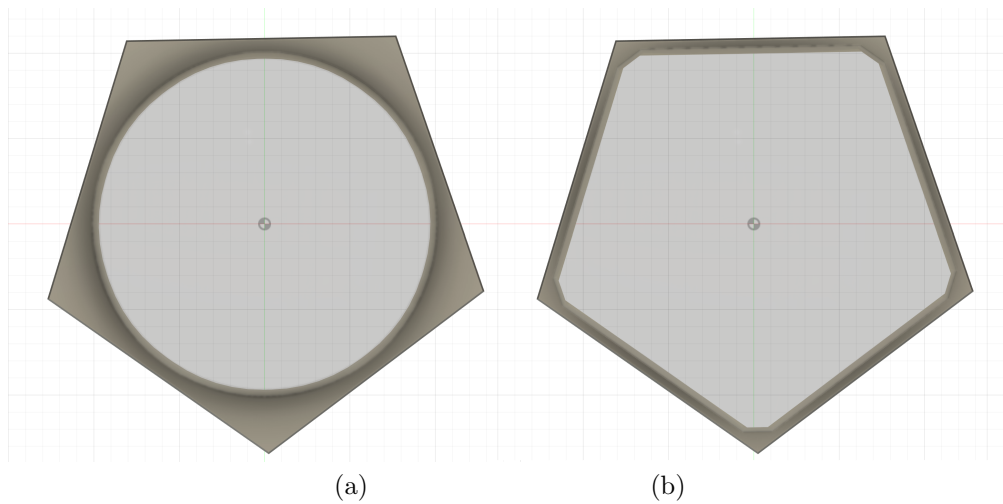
Front view of the MezzoCielo lens assembly: (a) circular lens, (b) pentagonal lens
